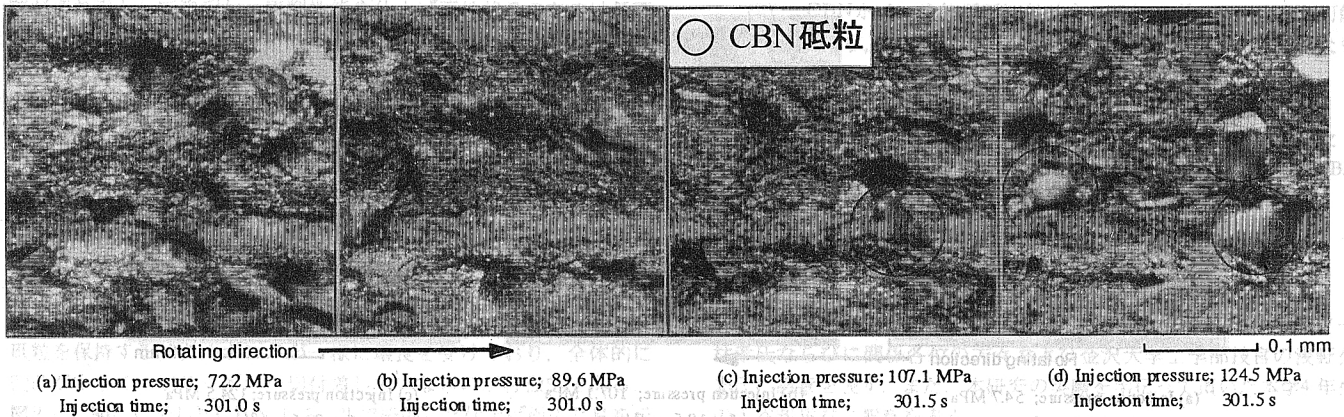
Photograph of CBN wheel surface on in-process erosion test
